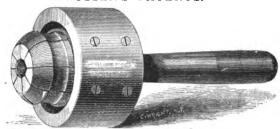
PATENT GUIDE RING TUBE EXPANDER.
